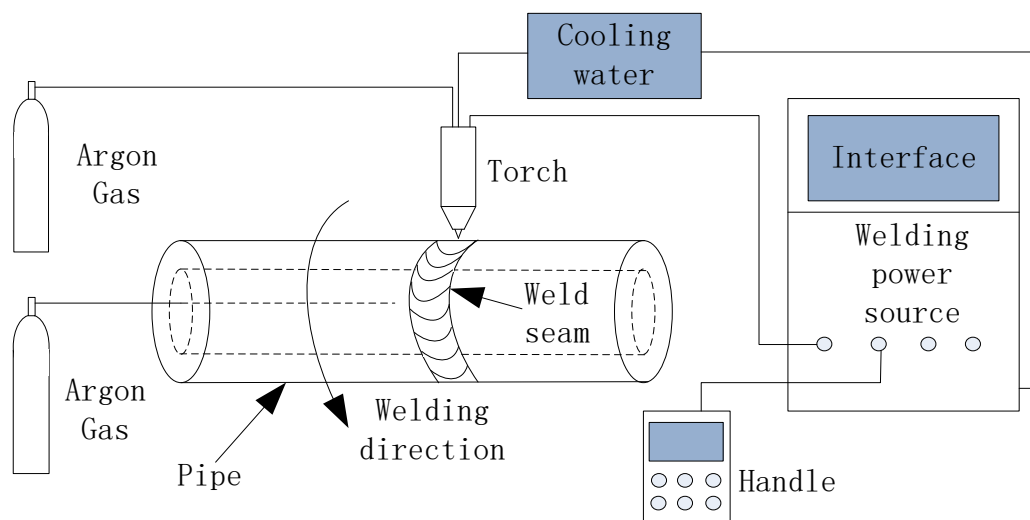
The schematic diagram of the system for all-position automatic tungsten inert gas (TIG) welding of pipes.
